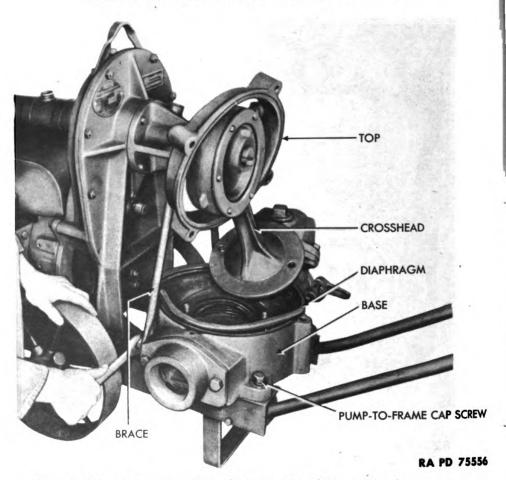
Removing Gasoline Engine-driven Diaphragm Pump
